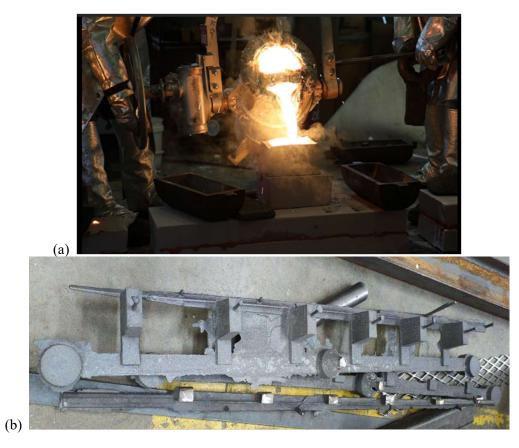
(a) Liquid steel pouring into the molds, (b) the casting after mold shakeout
